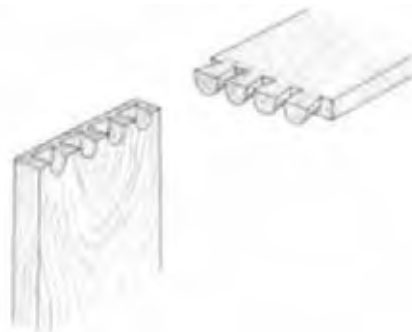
C6-2 Half-blind dovetail cut with a router and dovetailing jig, or with a special dovetailing machine.
